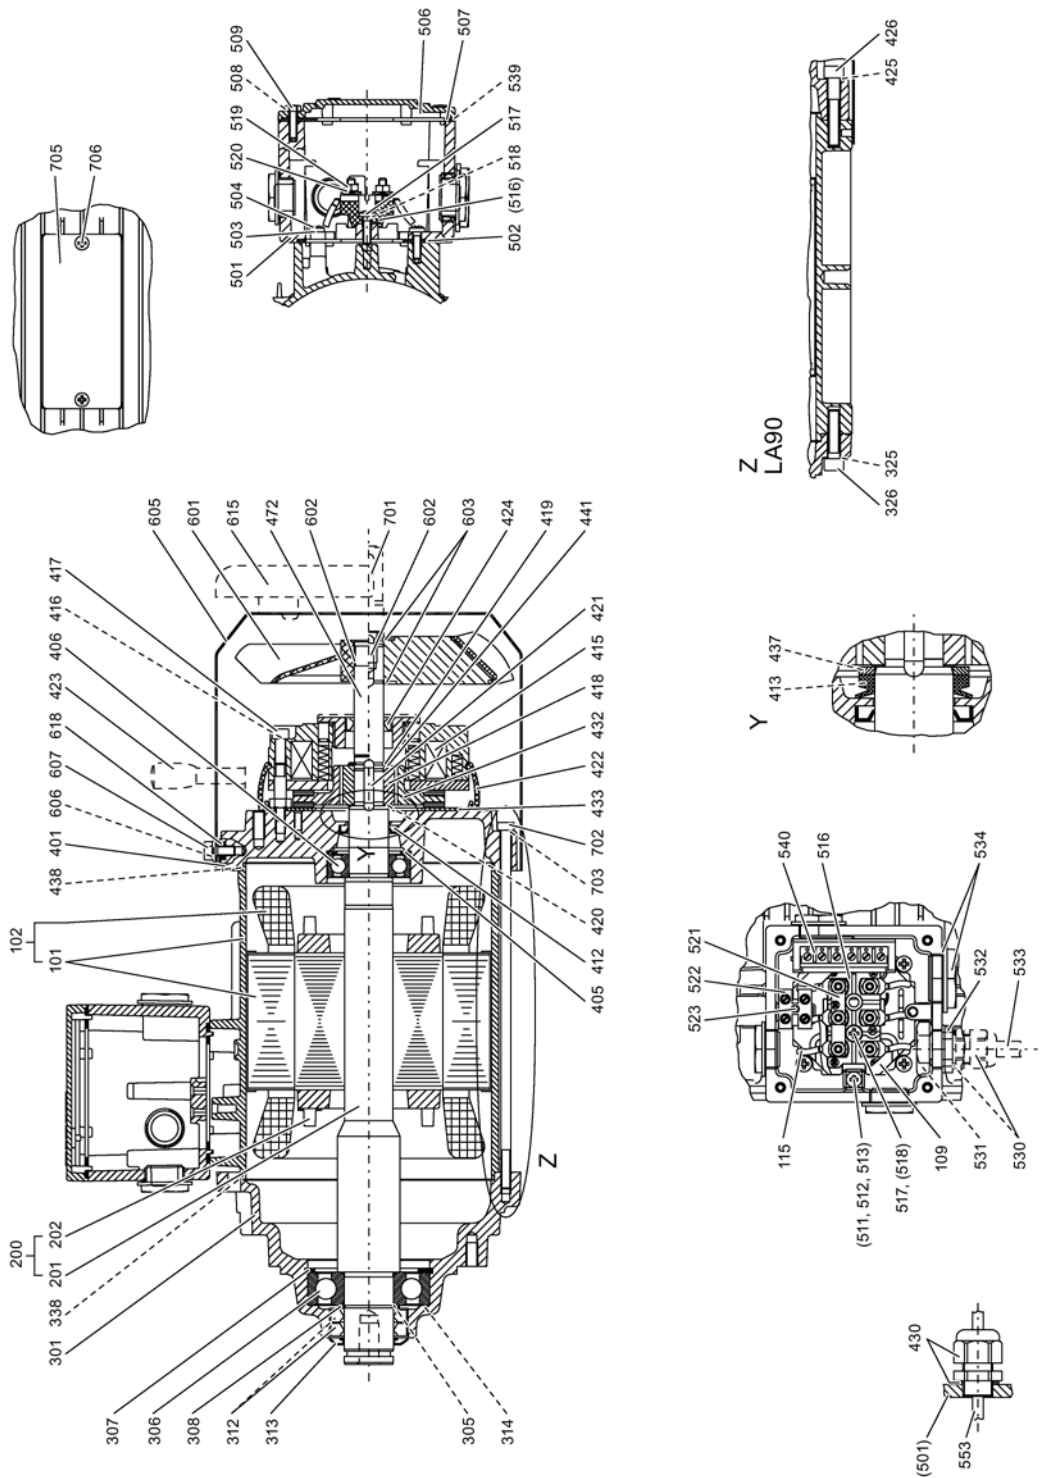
MODULOG brake motor sizes LA71 - LA90
